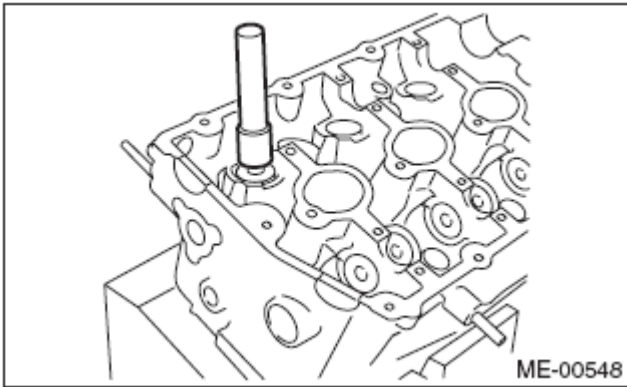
Pressing In Intake And Exhaust Valve Oil Seal Using ST2
